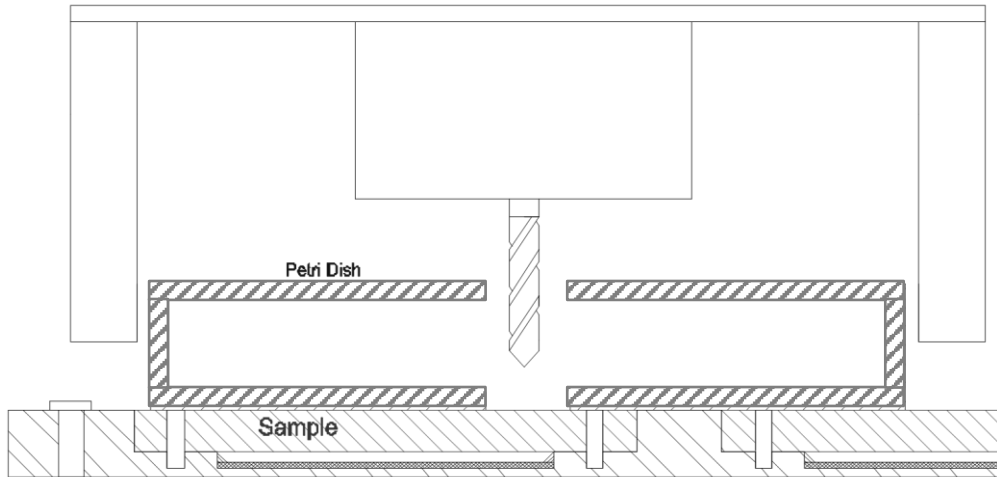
CNC Machine Implemented in the Chamber for Machining Operations
